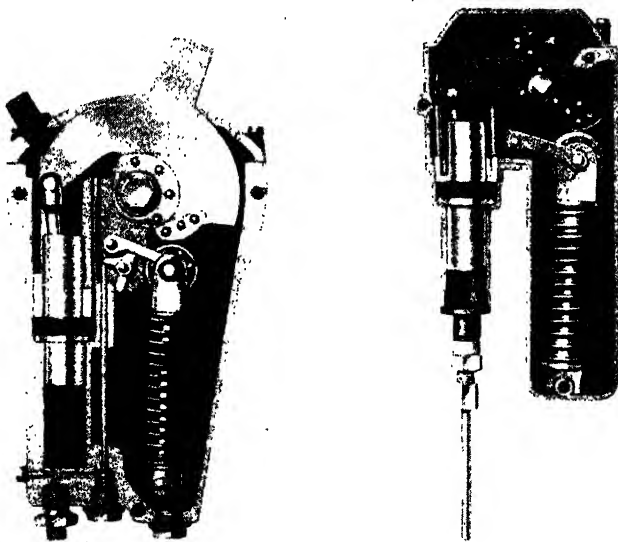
Exactor transmitter, left ; and receiver, right.
